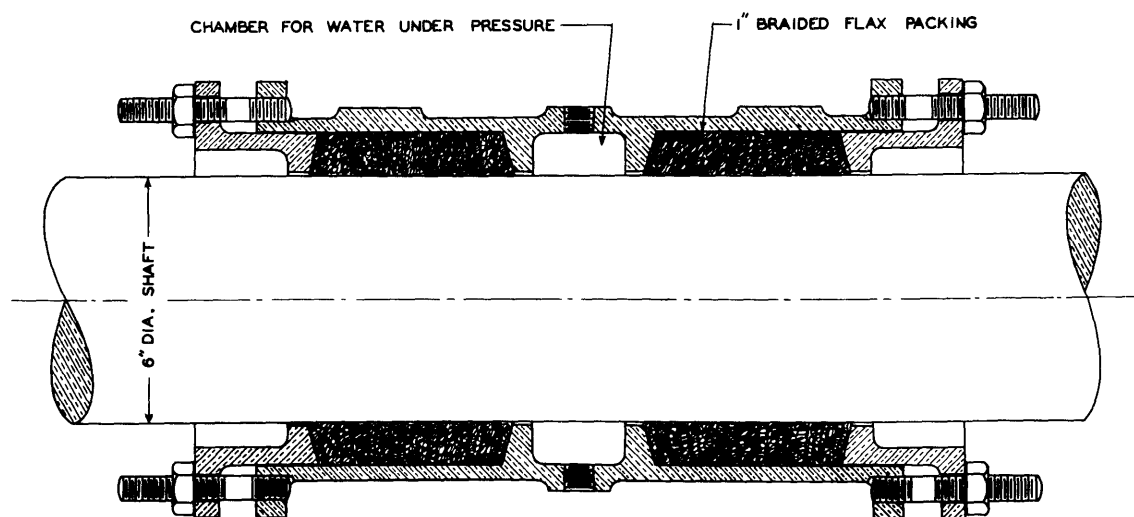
, CROSS-SECTION OF STUFFING BOX AS FIRST TESTED.
